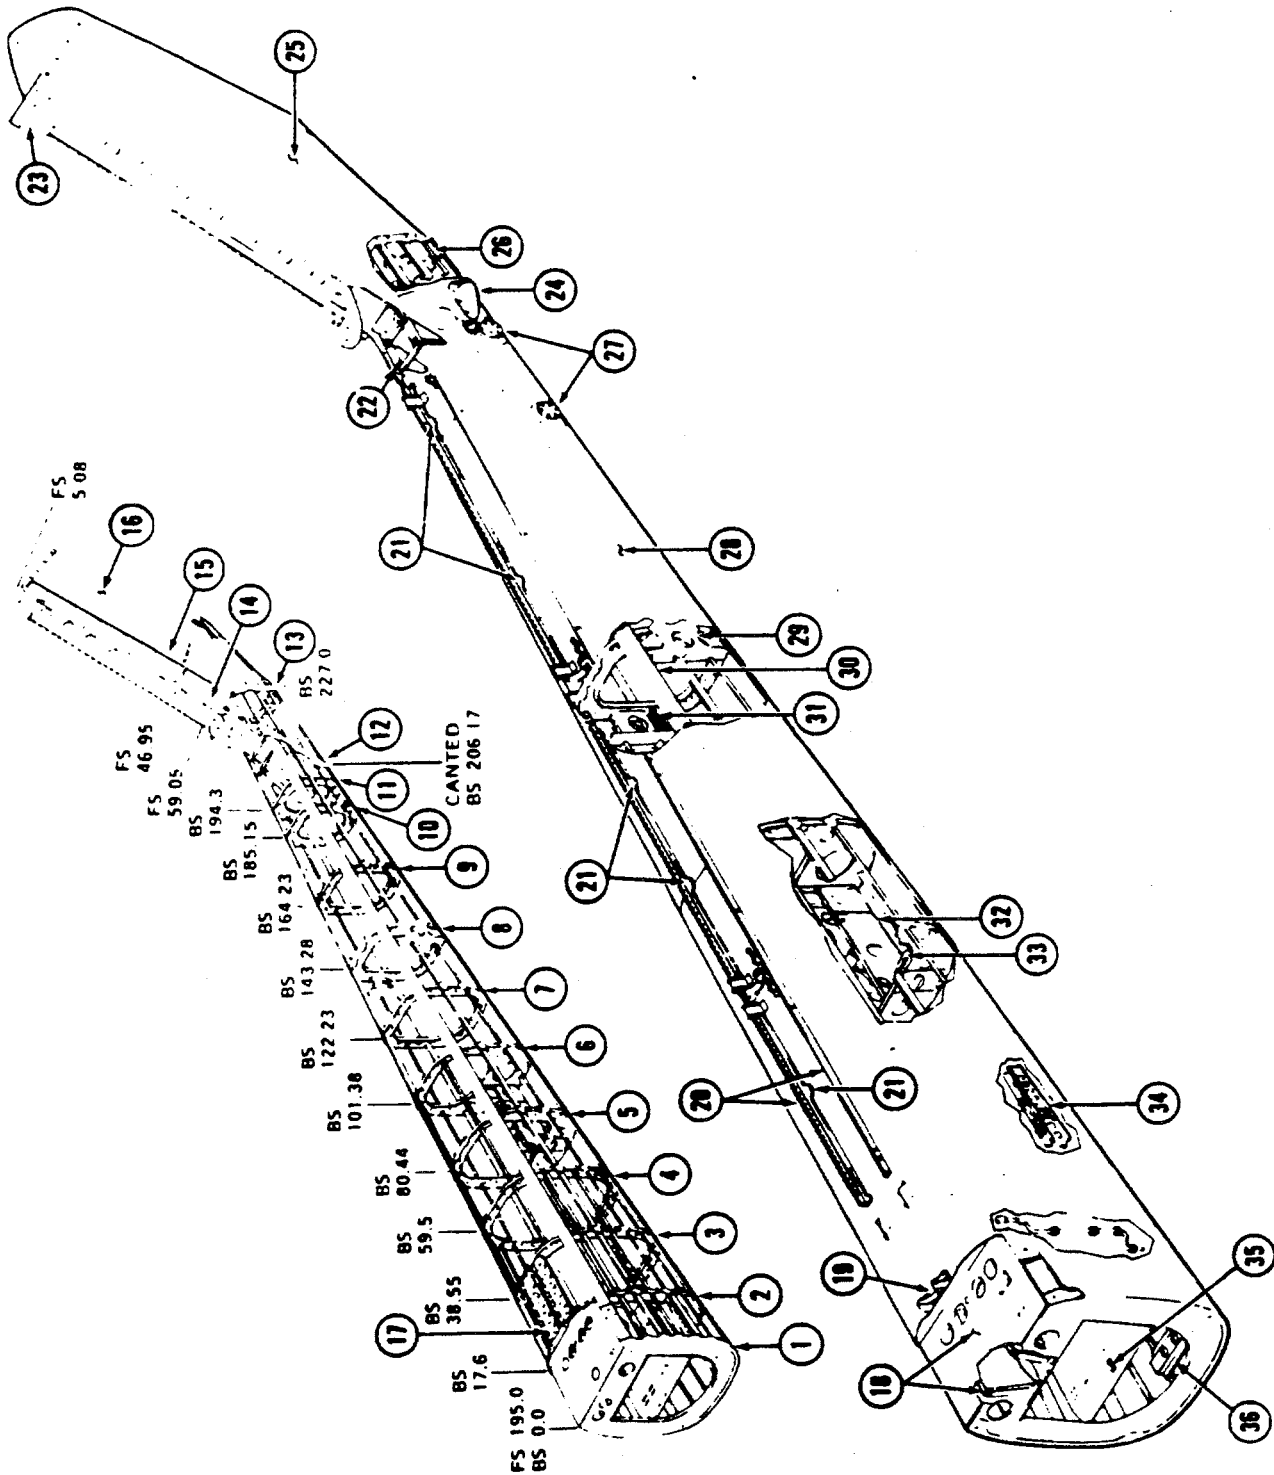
204-030-800-491 tail boom (Sheet 1 of 2)
